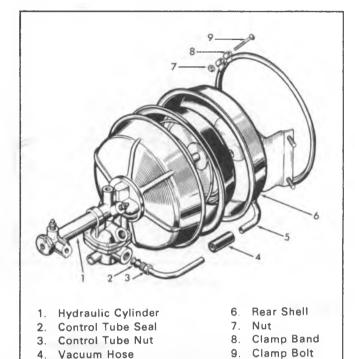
D-Removal of Control Tube, Clamp Band, Rear Shell and Diaphragm
